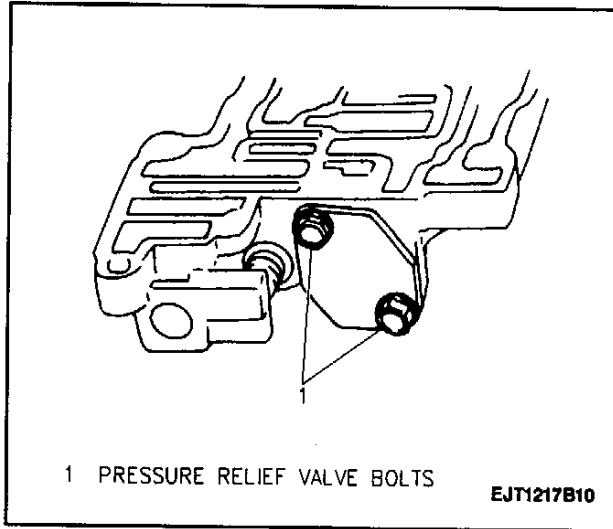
Pressure Relief Valve Bolts (03-72LE, 4-Speed)
